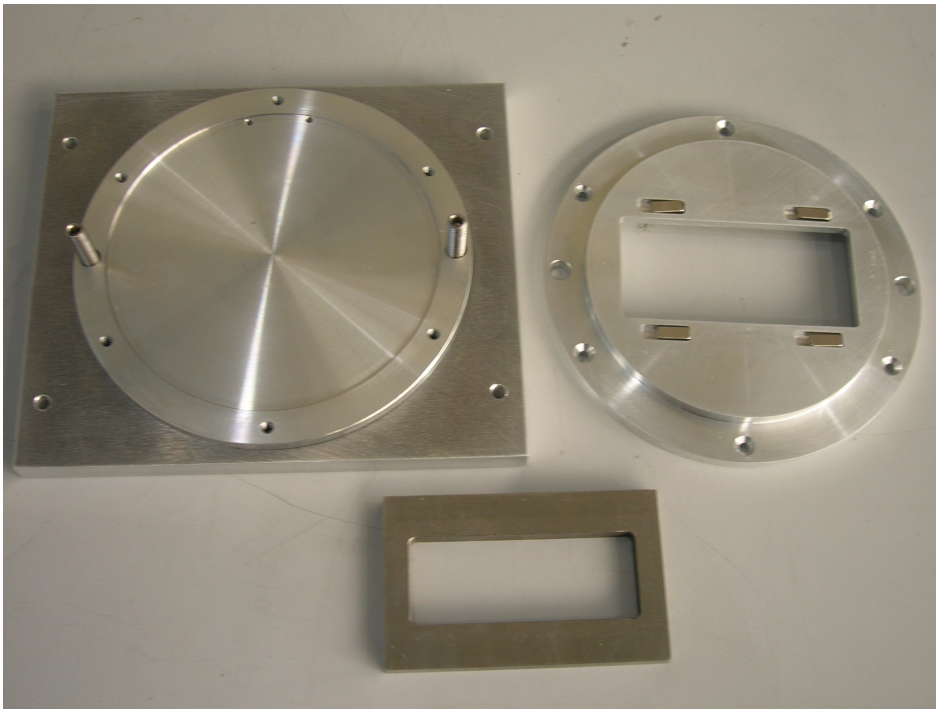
Photograph of the wafer mounting system for rectangular masks.
